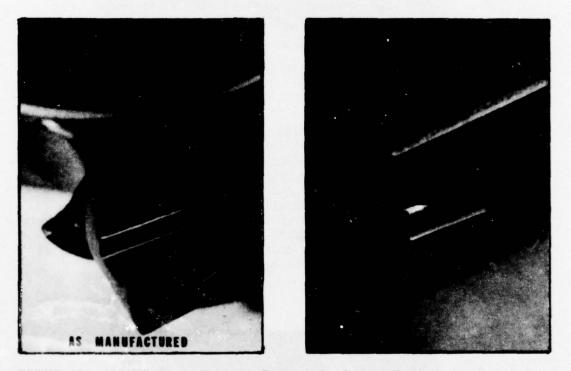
Wear Pattern Between Contact Surfaces of the Helical Torsion Spring and Hanger
